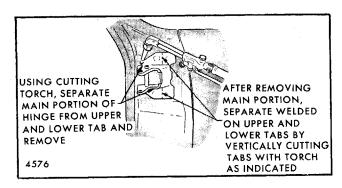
Body Side Hinge Strap Removal - X Styles Shown, H Styles Similar
